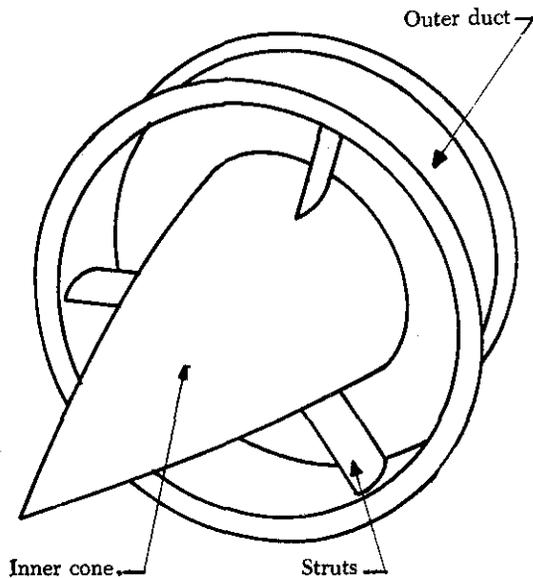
Exhaust collector with welded support struts.
